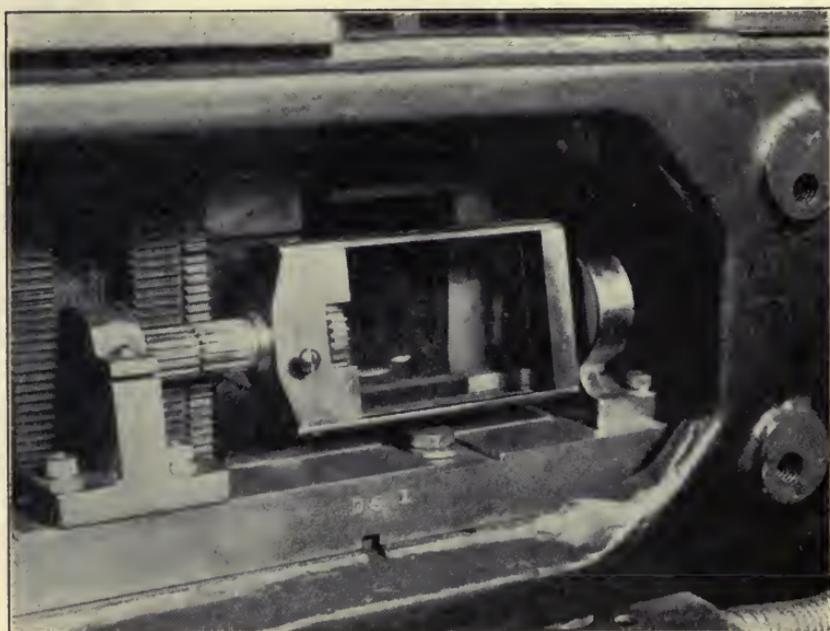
Close-up of plane-parallel glass plate; note the pinion-gear engaged by the ring-gear and the gear on the slide-carrier.
